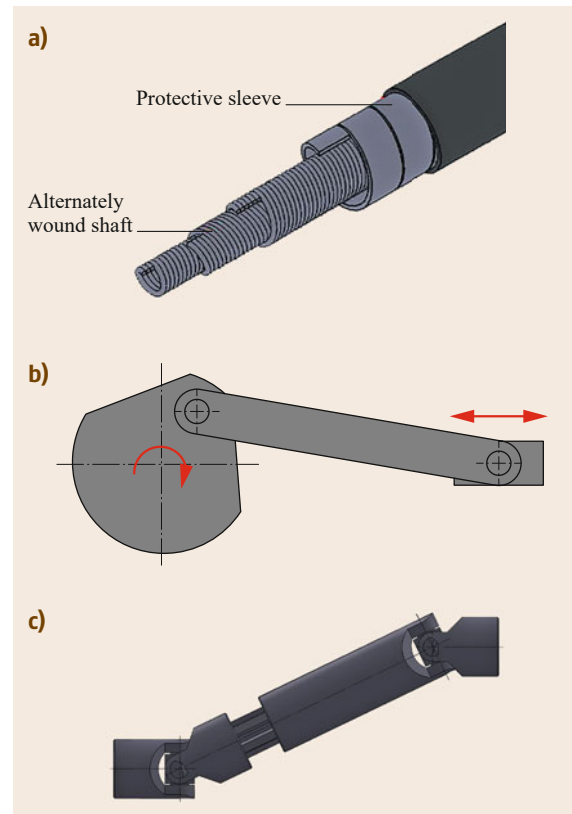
c Special types of shafts: (a) flexible shaft, (b) crankshaft, and (c) cardan shafts
